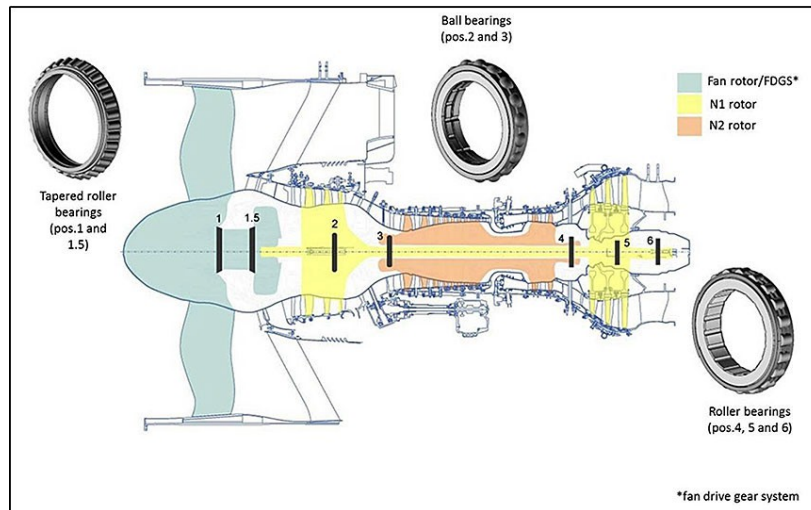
Bearing configuration of the Pratt & Whitney PW 1000 engine
